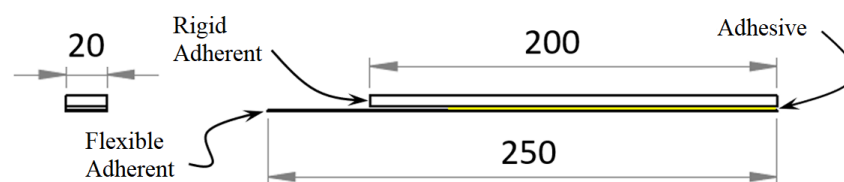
Geometry of the floating roller peel test specimens (dimensions in mm).
